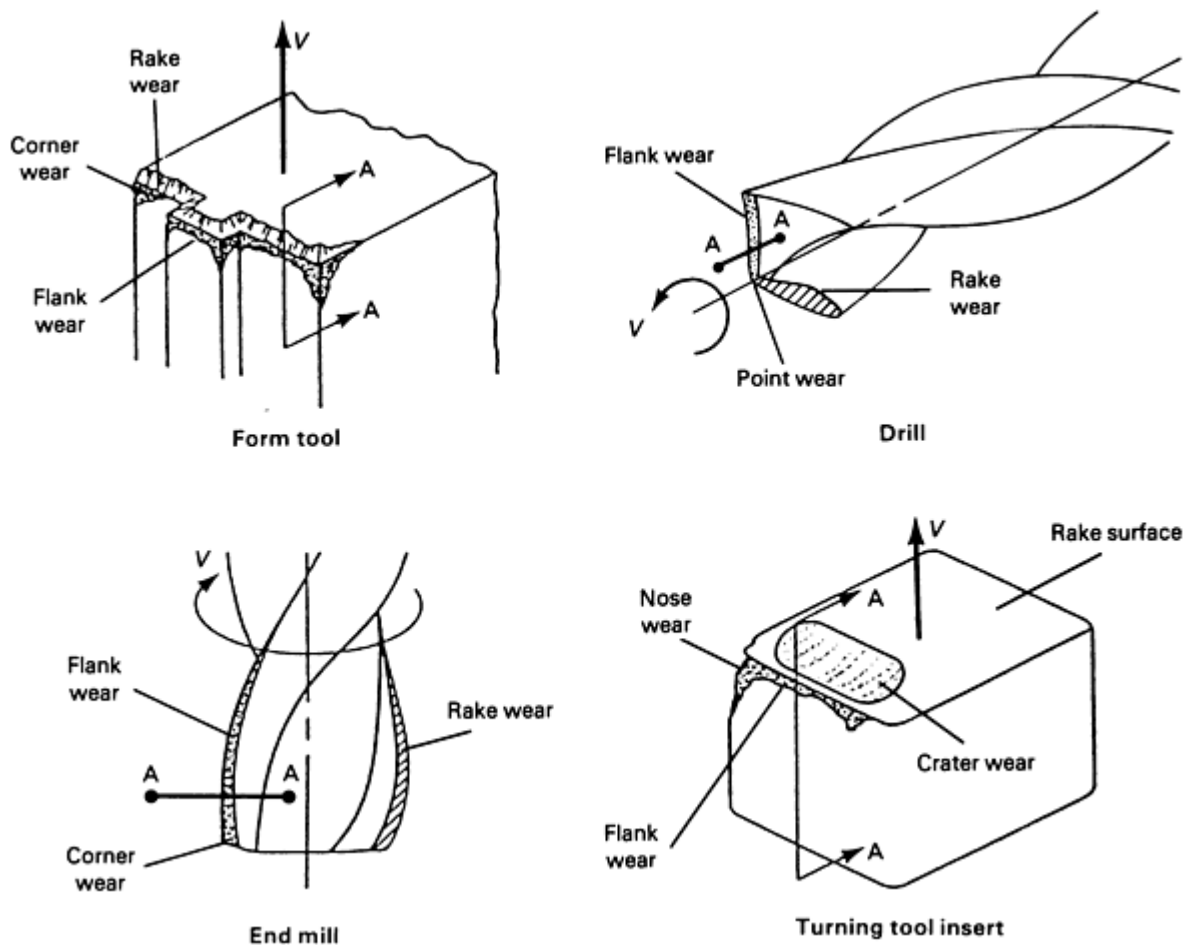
Wear surfaces on common tools due to the tool motion, V
